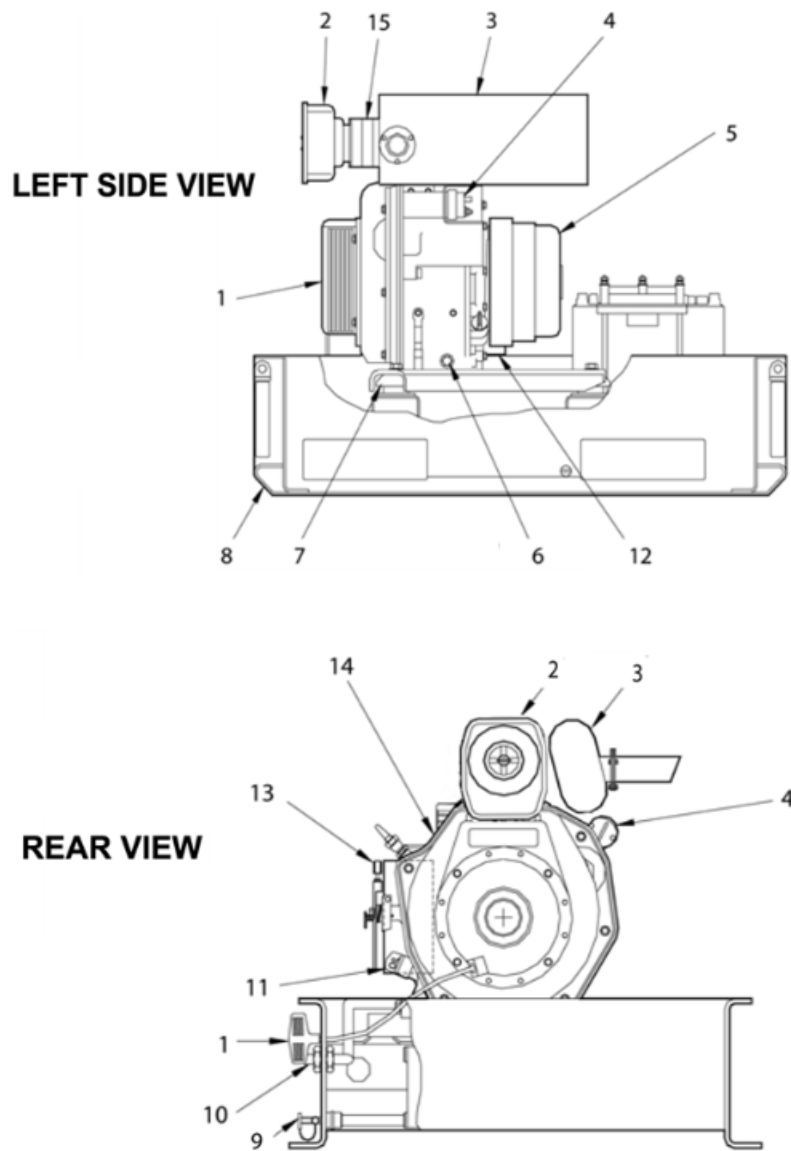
Diesel Engine/Generator Assembly (Sheet 2 of 2).
